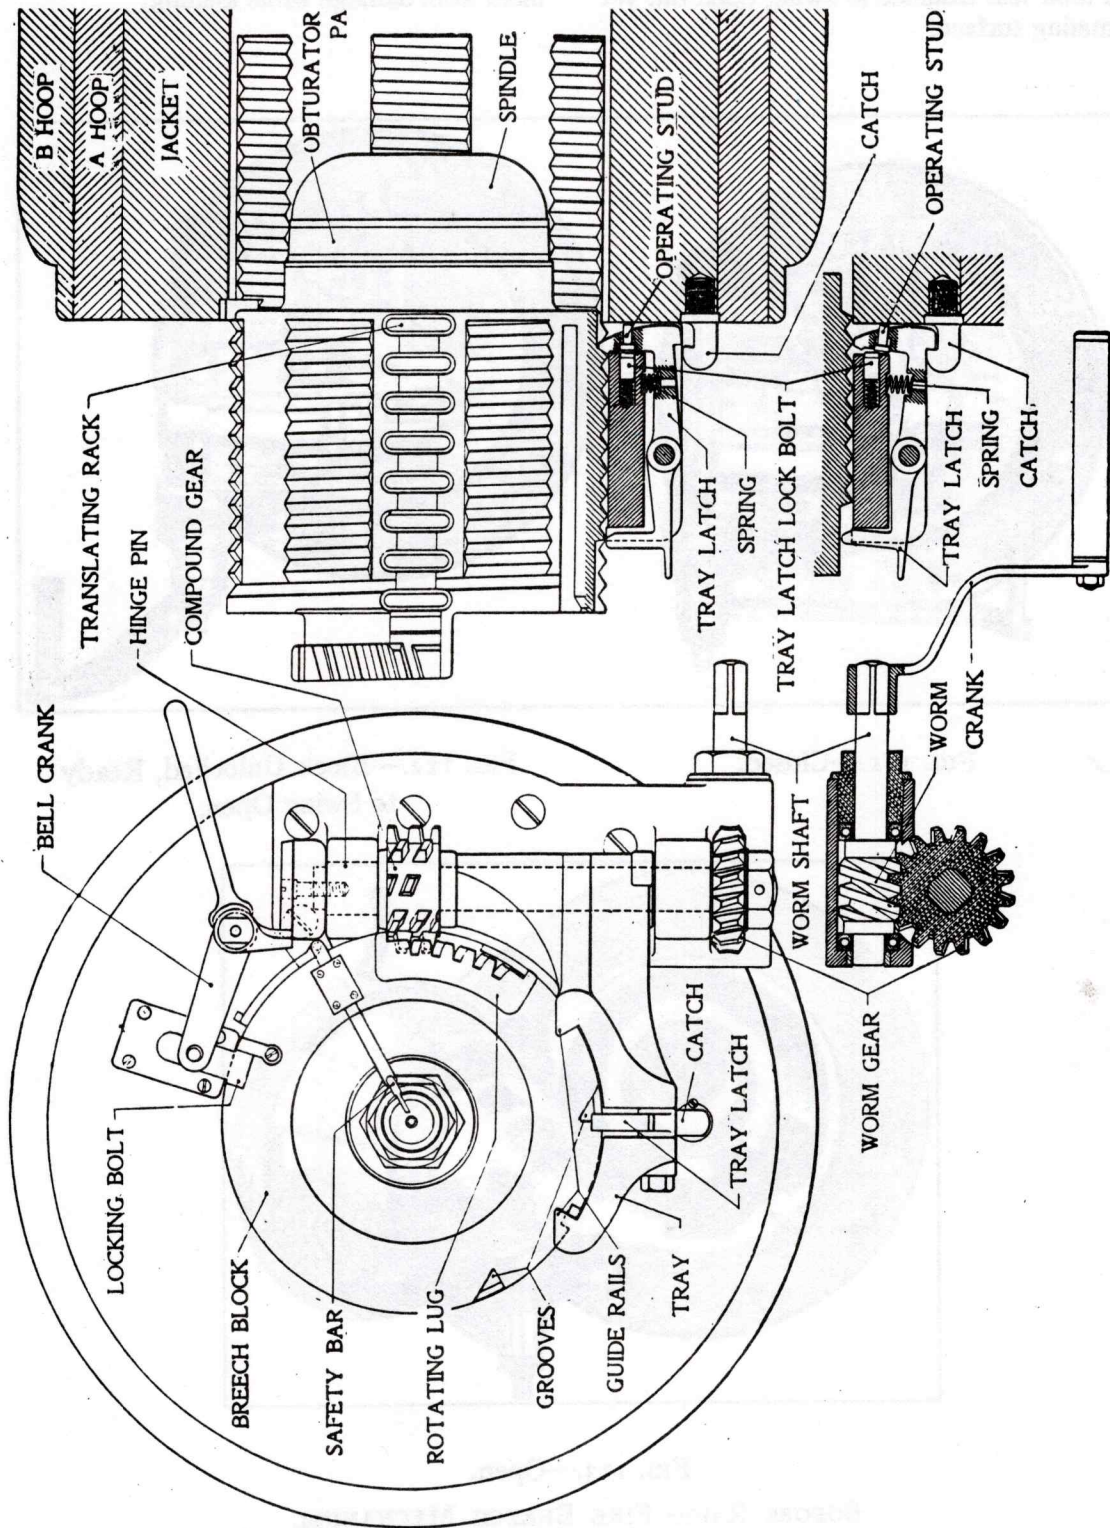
Breech Mechanism, Old Type, for Heavy Guns.
